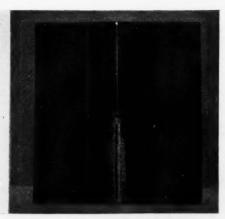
In butt welding, the sheets spread slightly as welding progresses because of initial expansion and will later, as contraction sets in, draw together. The welder must know how to approximate the opening and closing of the seam so that edges will come together evenly.
